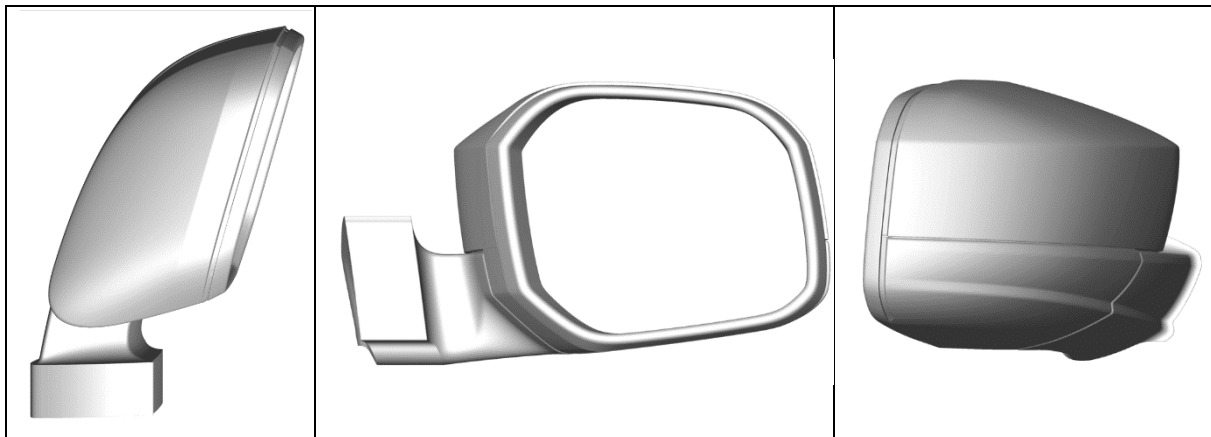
Side-view mirror in top view (left), rear view (middle) and side view (right).
